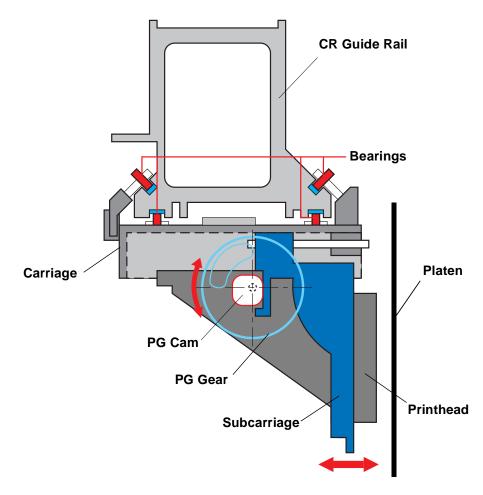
CR Guide Rail and PG Mechanism (side view)
